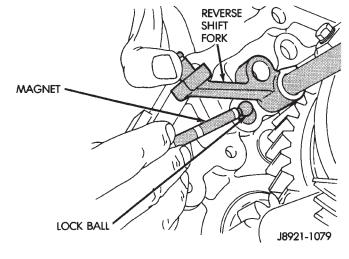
Remove Fifth Gear Shift Rail Lock Ball
